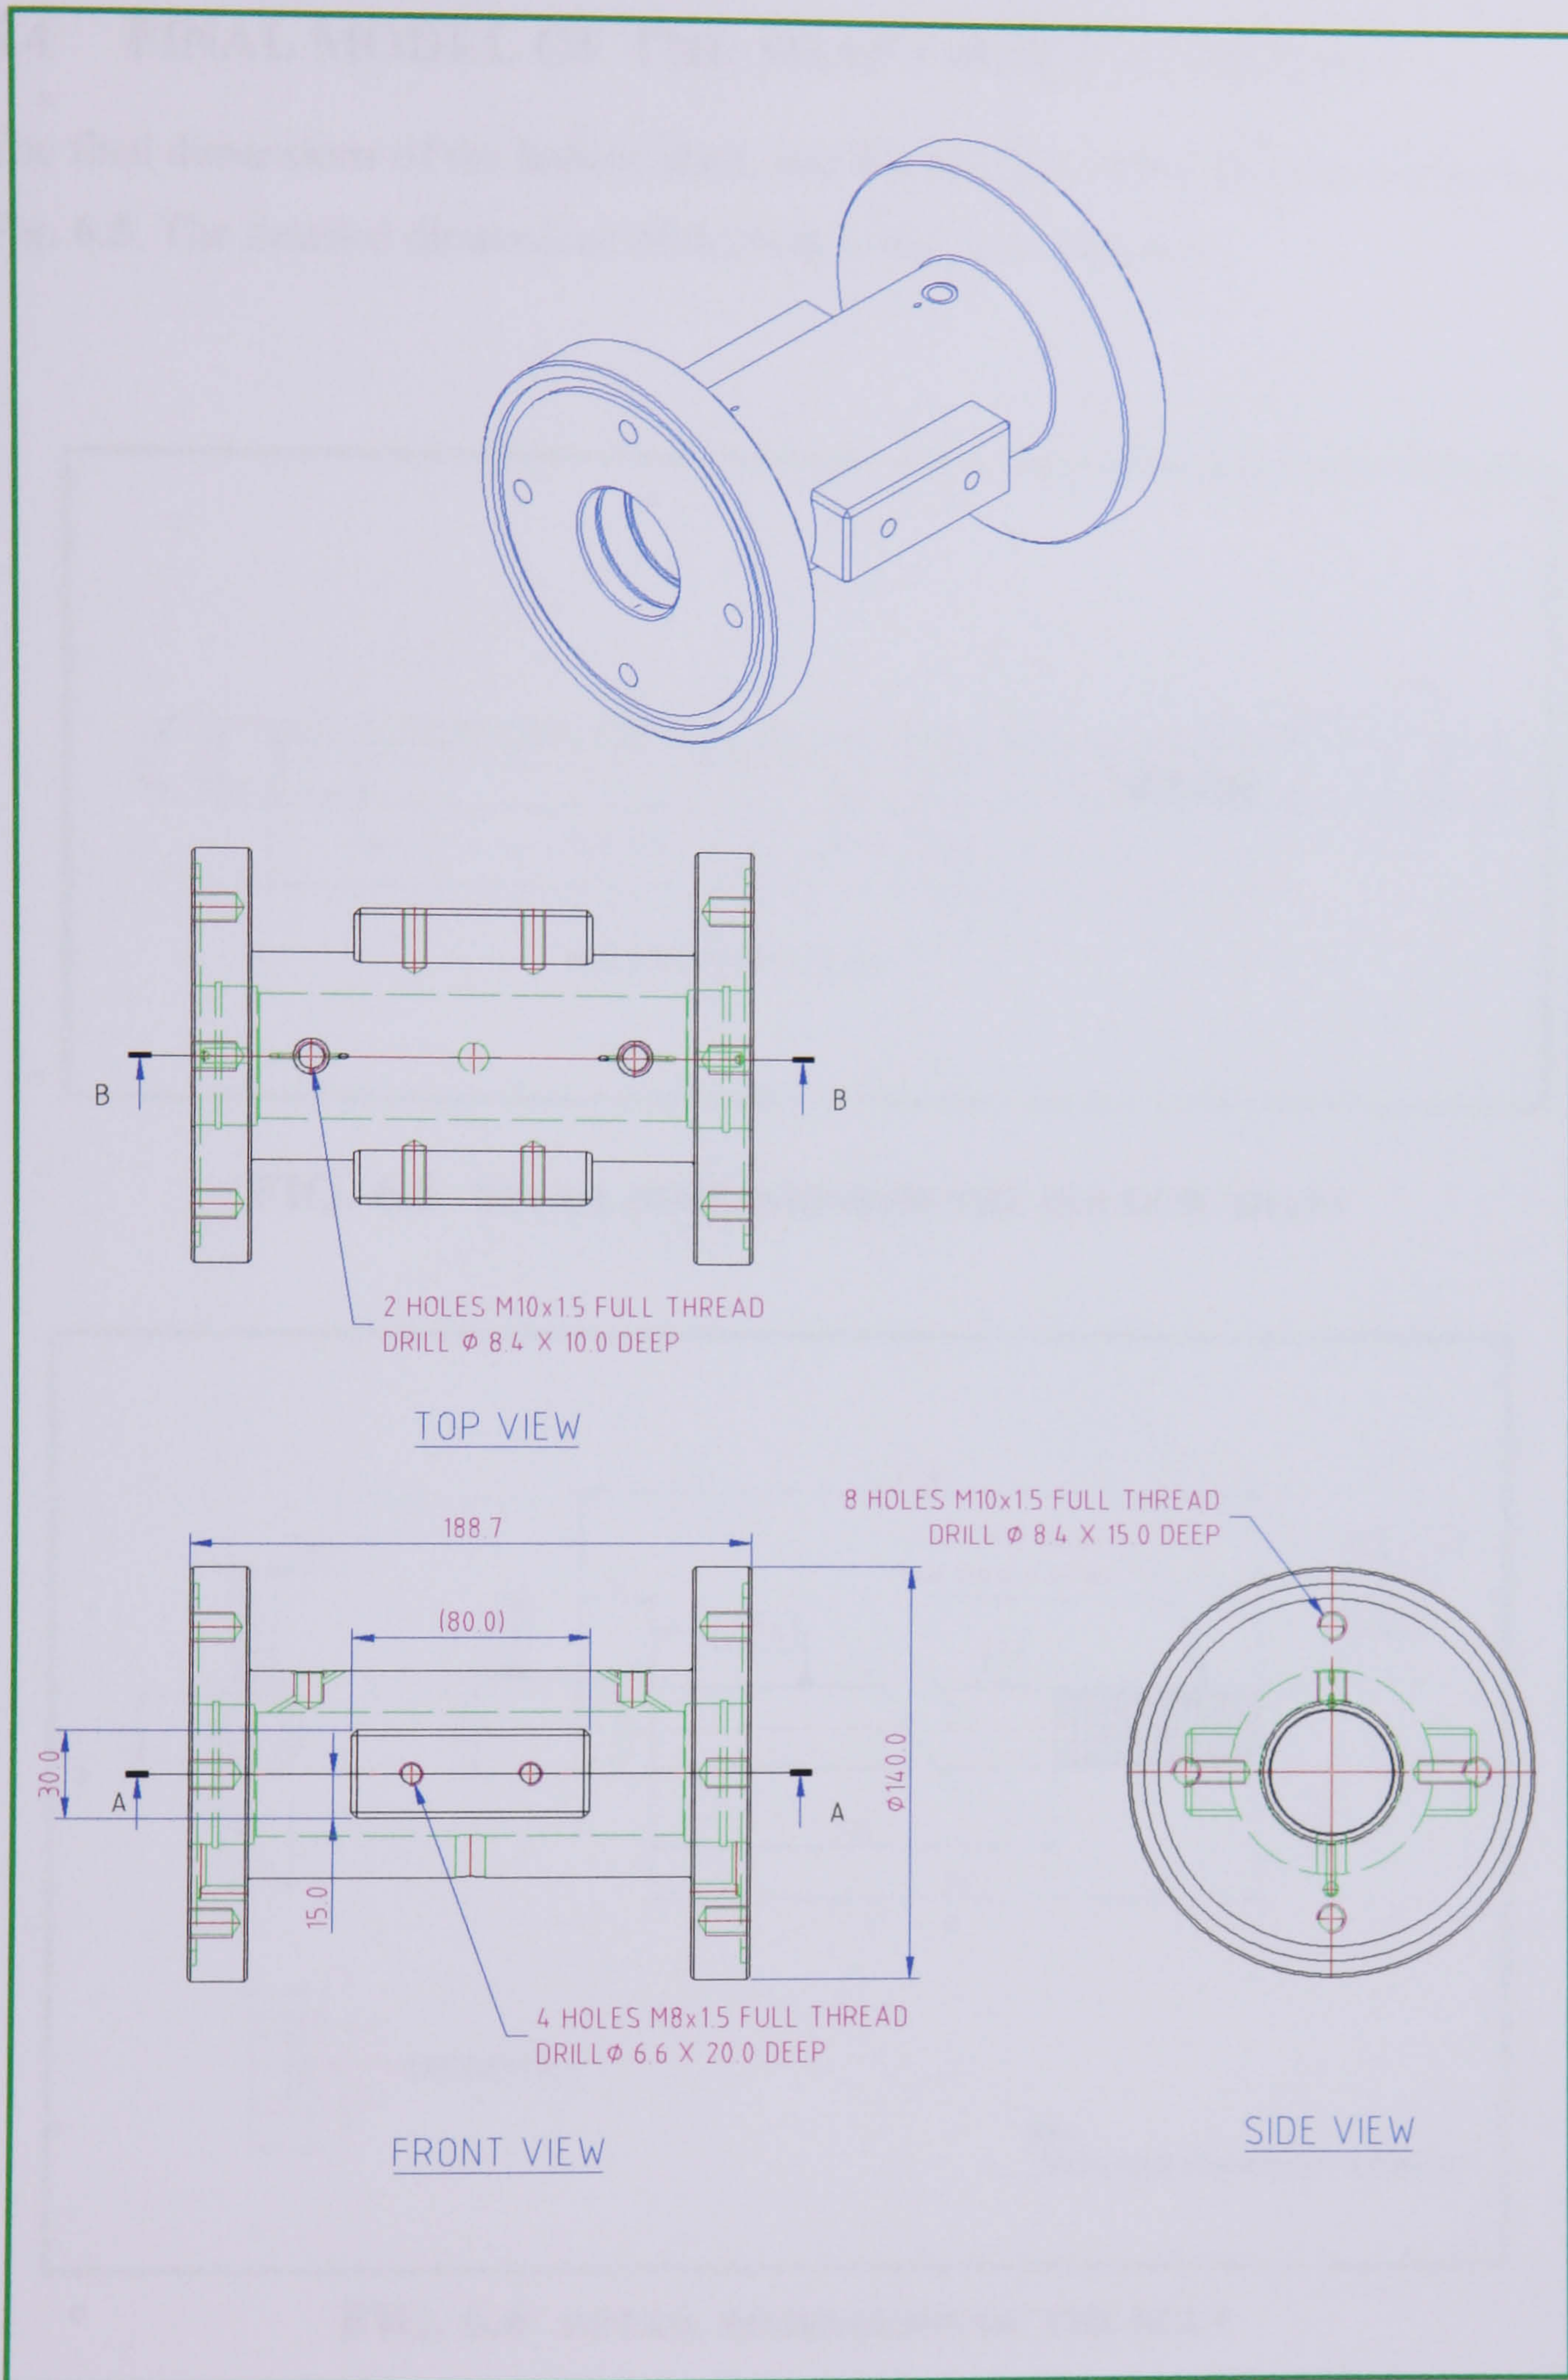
DETAIL DRAWINGS OF THE BEARING HOUSING
